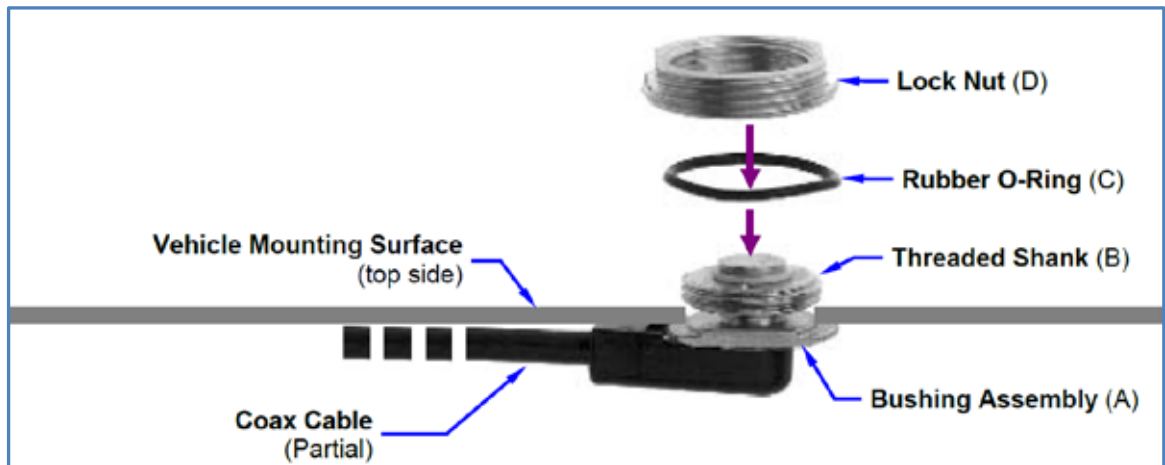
Installing Standard 3/4-Inch NMO Antenna Mount AN-125001-002
